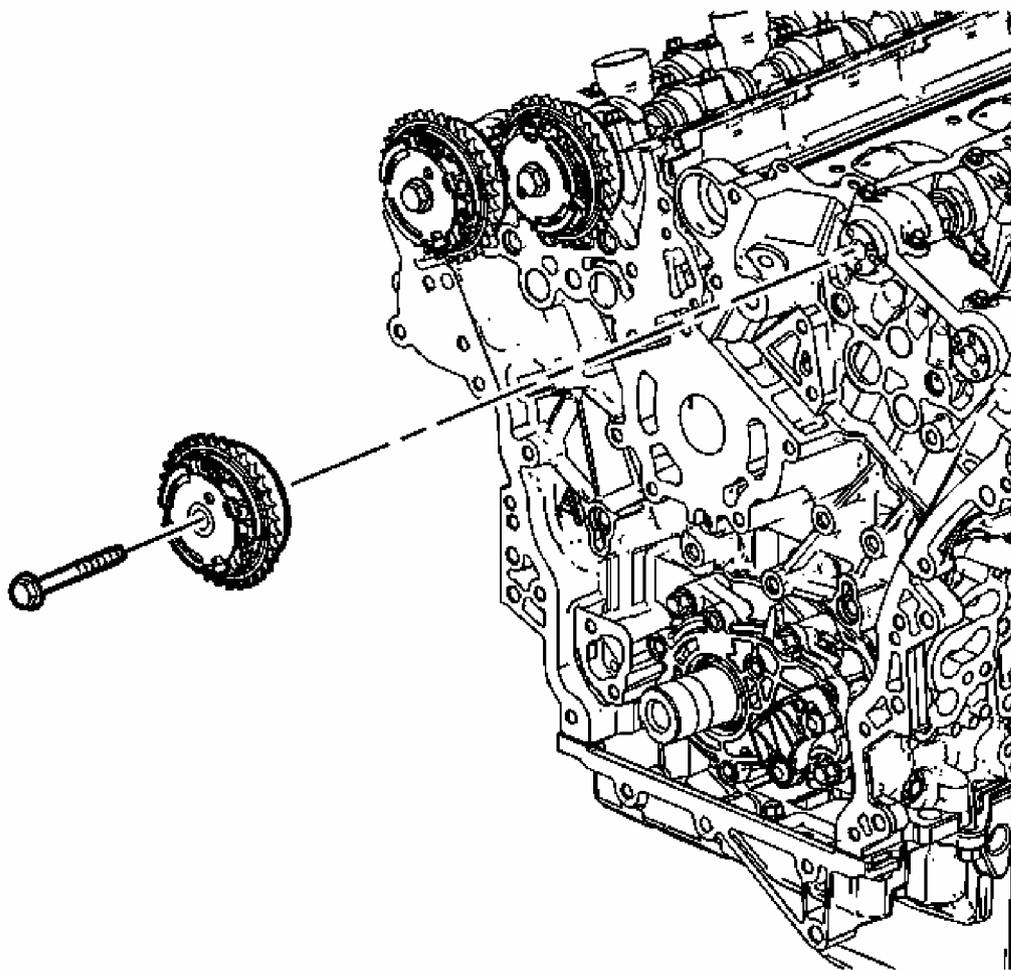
Removing/Installing Camshaft Position (CMP) Actuator
